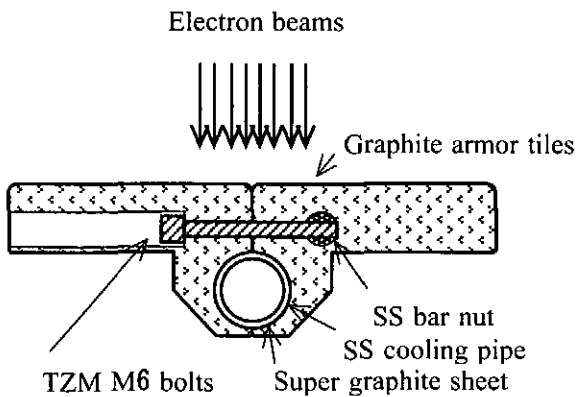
Cross-sectional view of surface boltless mechanically attached divertor plate for LHD.
